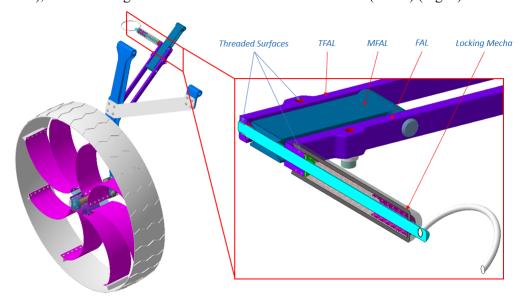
Cross-sectional view of the arm assembly's locking mechanism
